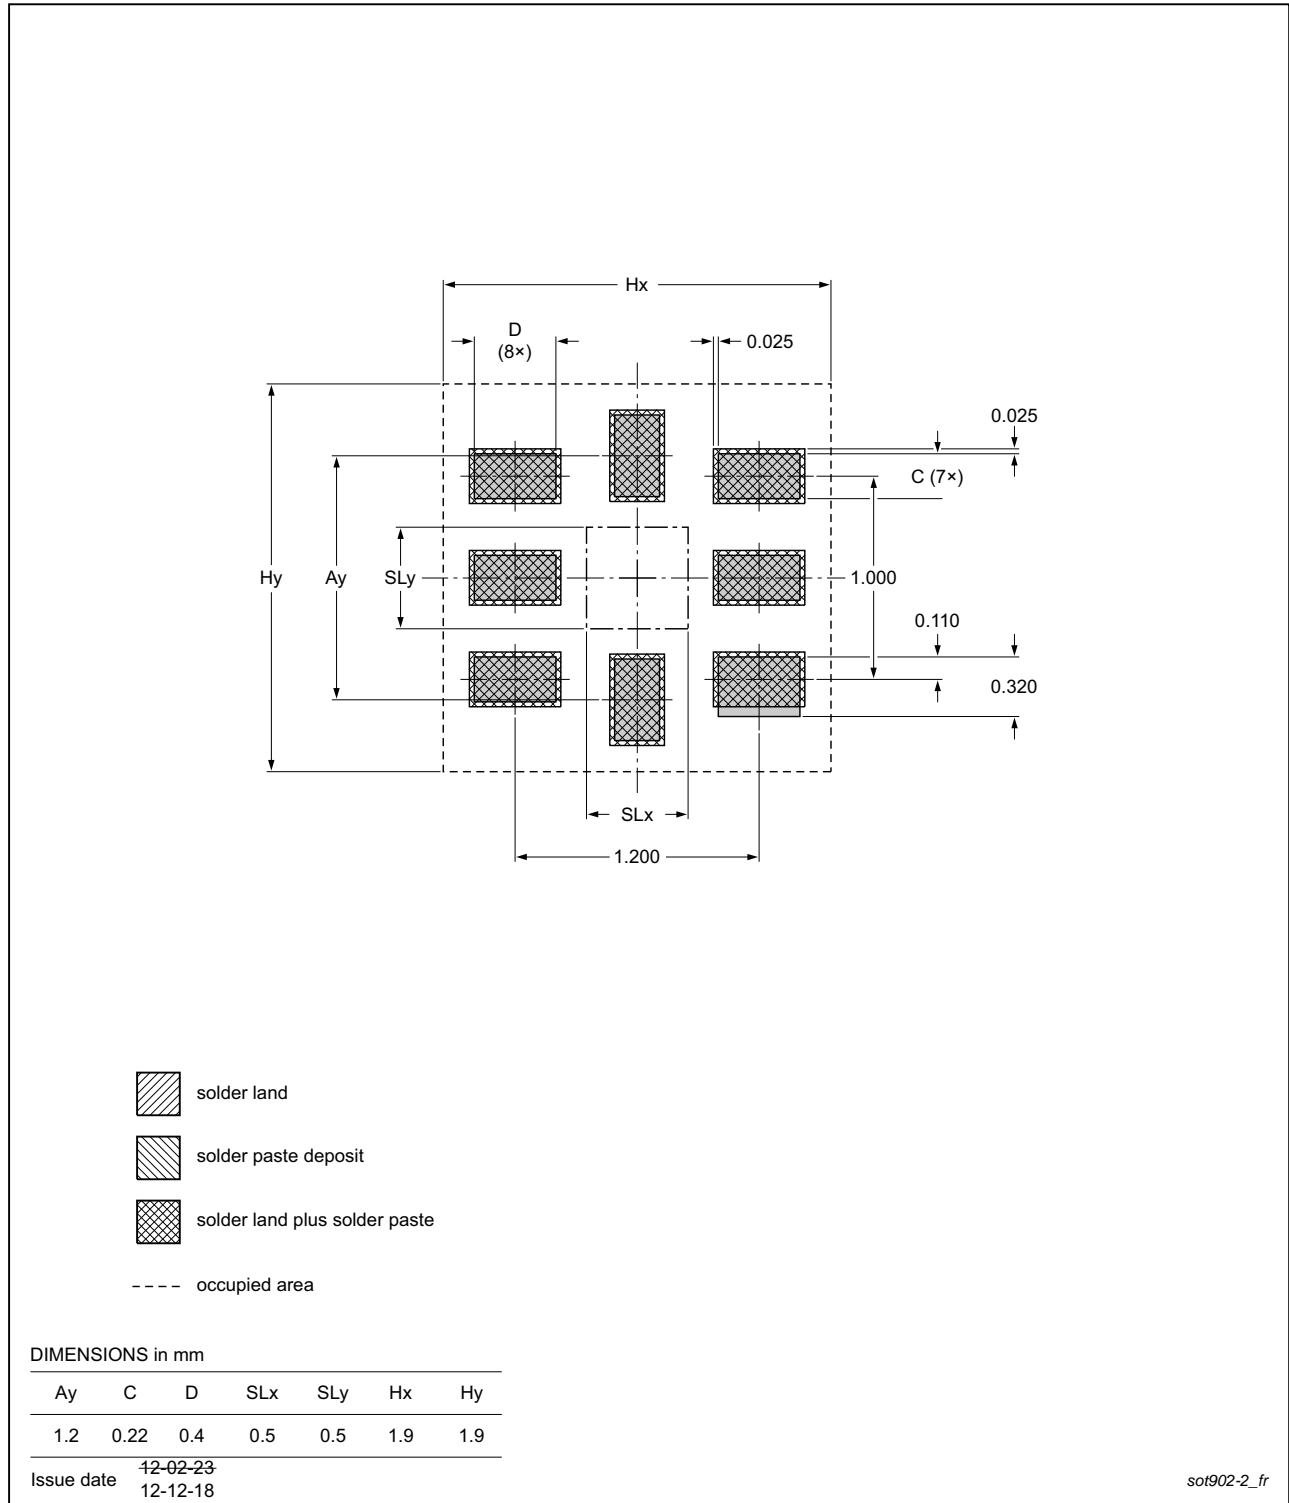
PCB footprint for SOT902-2 (XQFN8); reflow soldering
